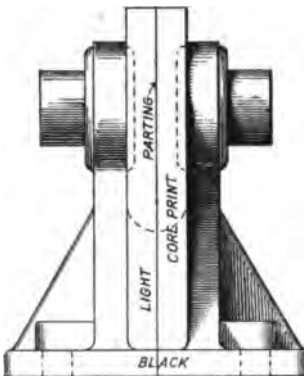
Side View of Pattern for Equalizer Bearing.
